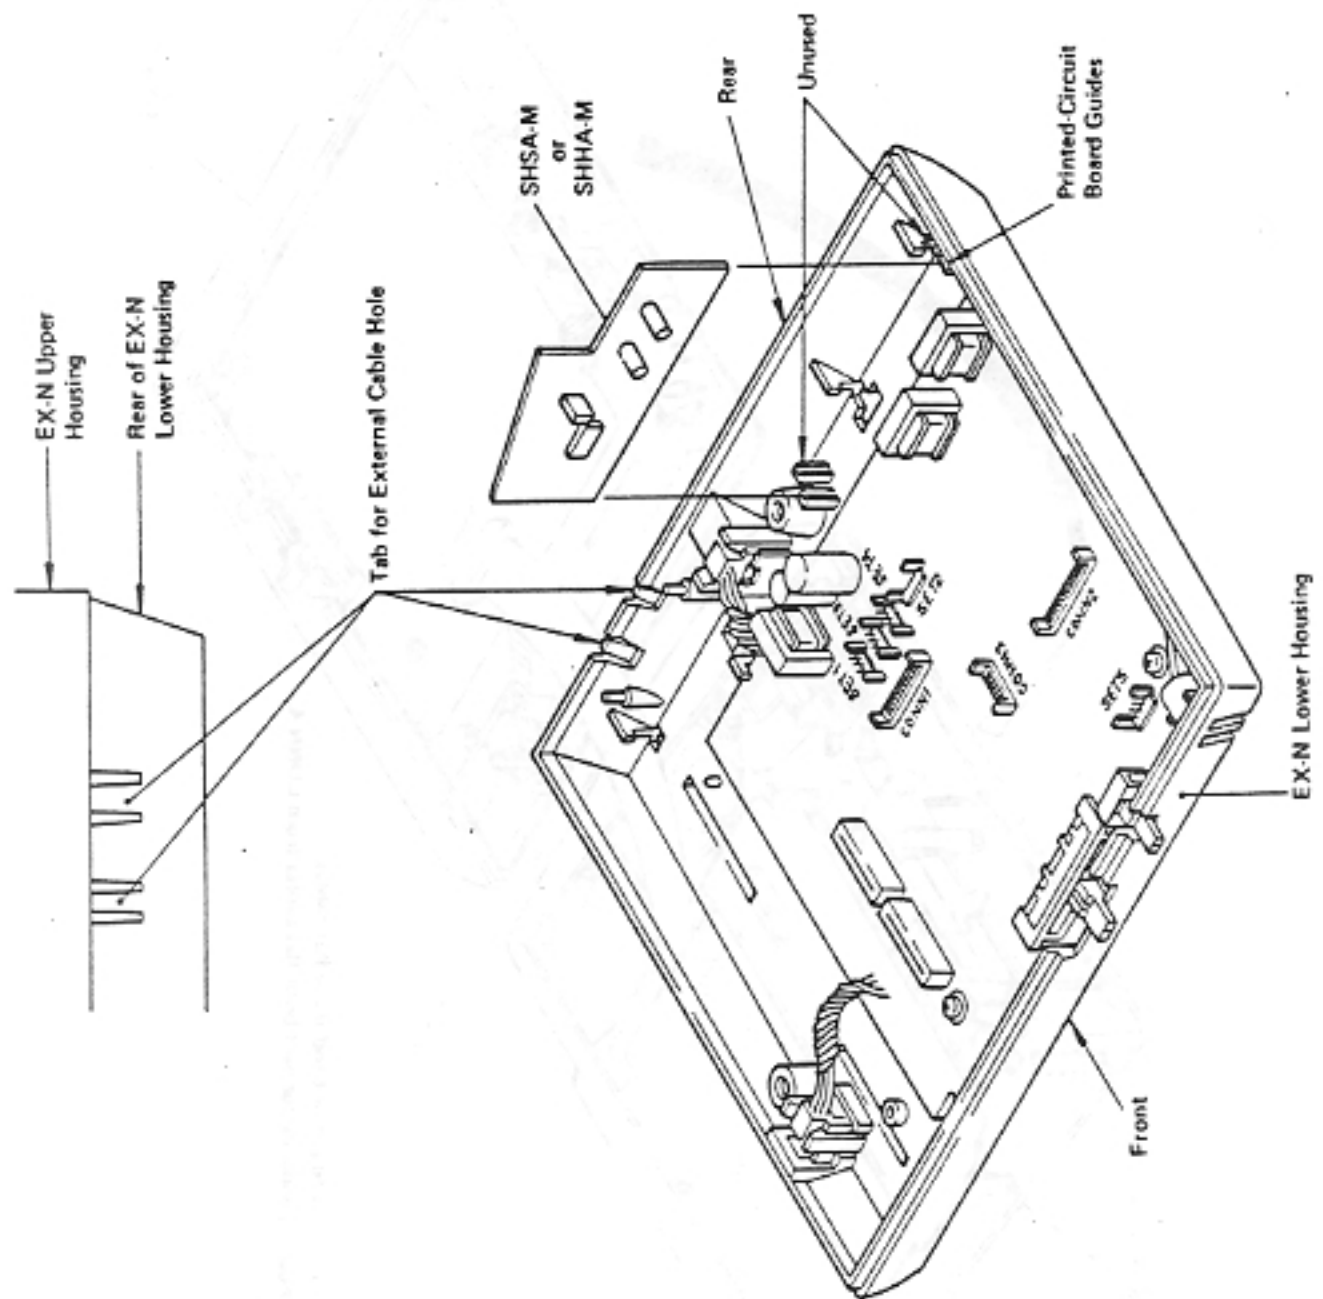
(2)(a) EX824/1648KN/DN Optional Unit Mounting in Lower Housing
